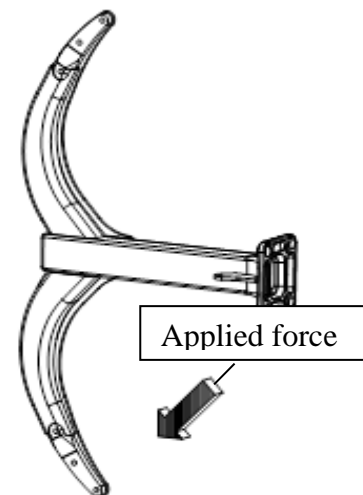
The weld between the horizontal tube and the legs on each side are as well critical points with regards to fatigue. Reworked from (Kverneland Group 2012).
